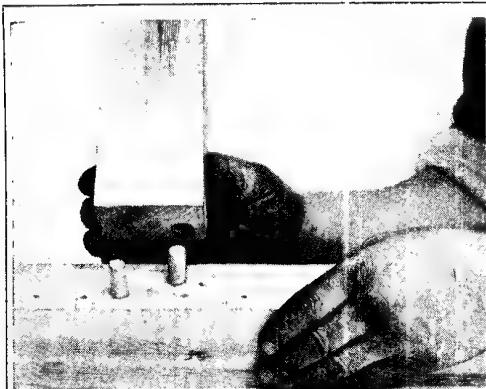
Dowelled joints permit two parts to be joined without reducing their length or breadth
